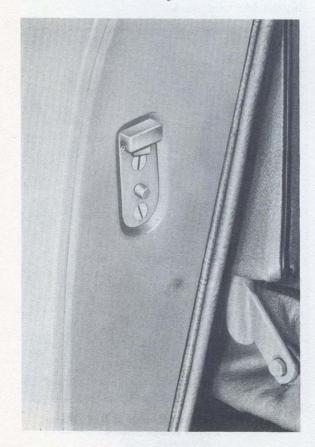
Door Lock Striker and Dovetail Assembly Right Side Shown.
